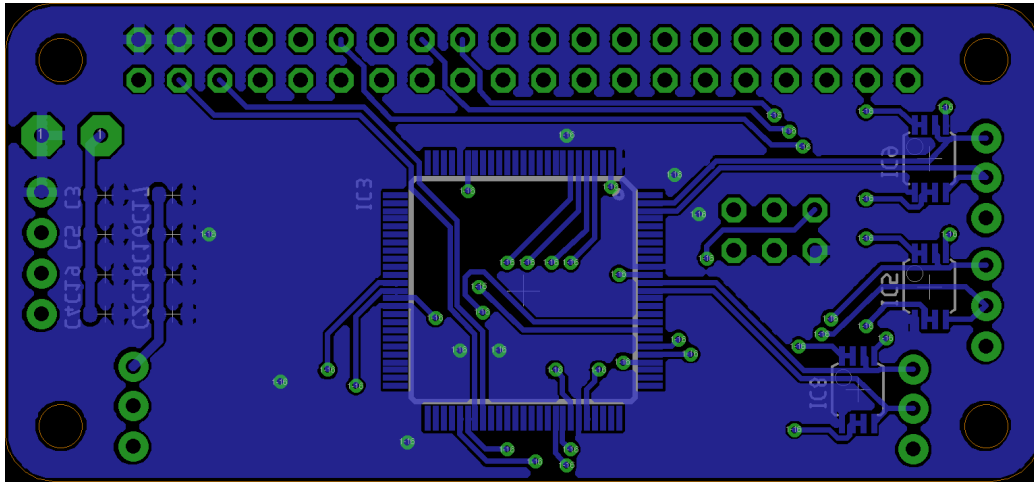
Daughter Board PCB Bottom Layer Revision 2
